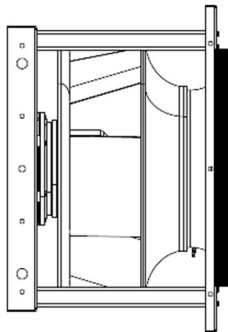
Modular EC Plenum Fan side view of the intake side with foam sealant
